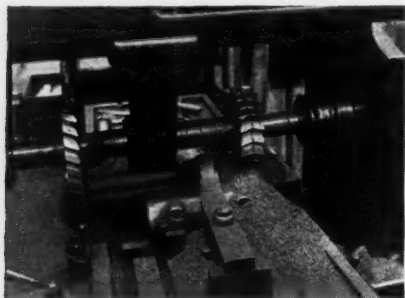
This machine picture taken at the Monarch Machine Tool Company demonstrates the high detail-revealing quality of mercury light. Even the tiny metal pieces shown are readily seen under this shadow-free light.
